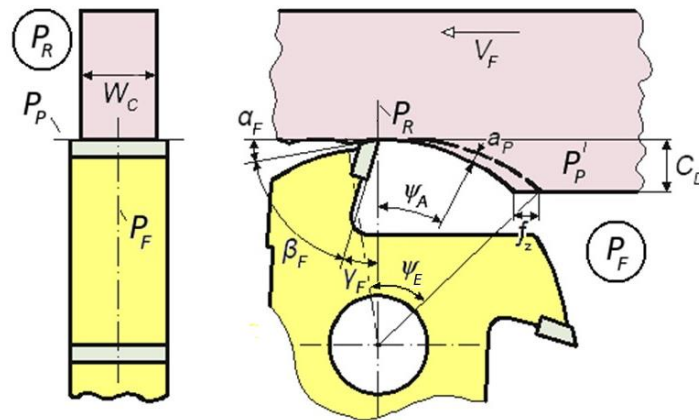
Cutting situation in longitudinal milling using the cutter with a hole: a_P – average thickness of cutting layer; ψ_A – average cutter-workpiece engagement angle; ψ_E – cutter-workpiece engagement angle; P_F – working plane; P_R – main plane; P_P – back plane
